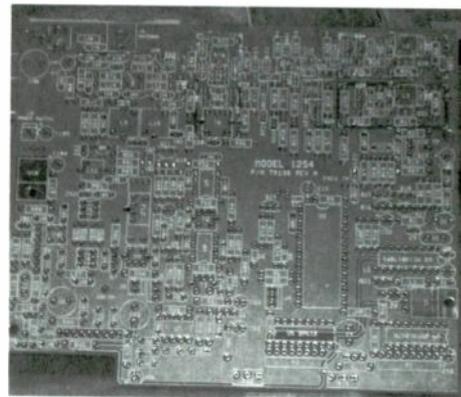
Naked 1254 main PCB - No components from the solder side.
